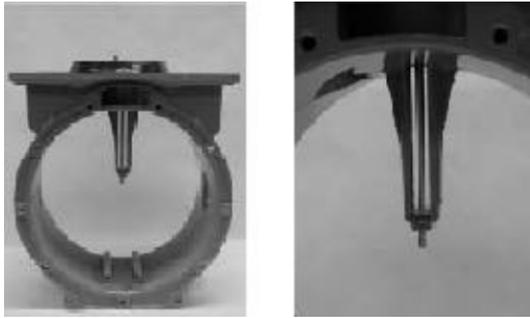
Old center casting design / Ancien modèle de pièce moulée centrale (before / avant 2007-06-05)
